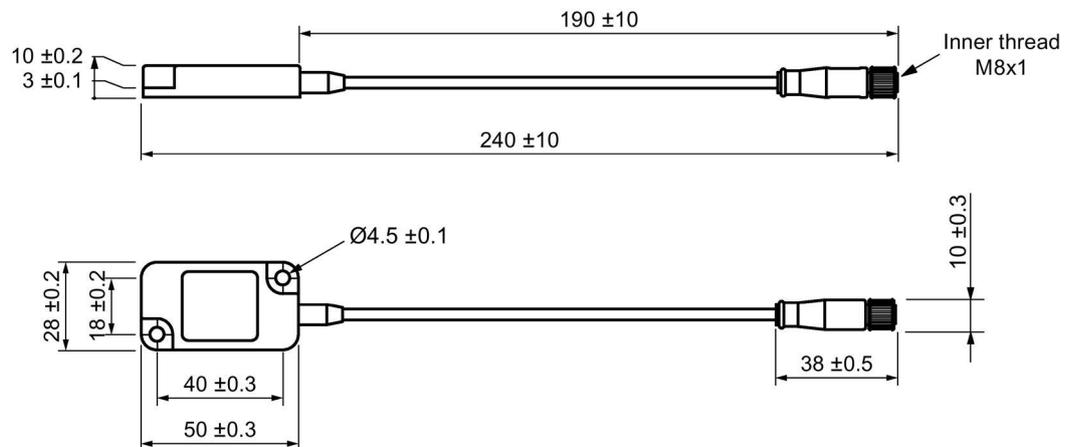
Dimension drawing ANT 3 7 ANT 3S
